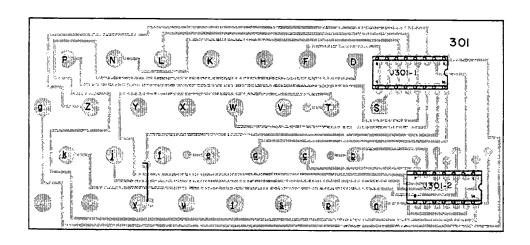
P.C. BOARD ASSEMBLY, BOARD 301, DRAWING
